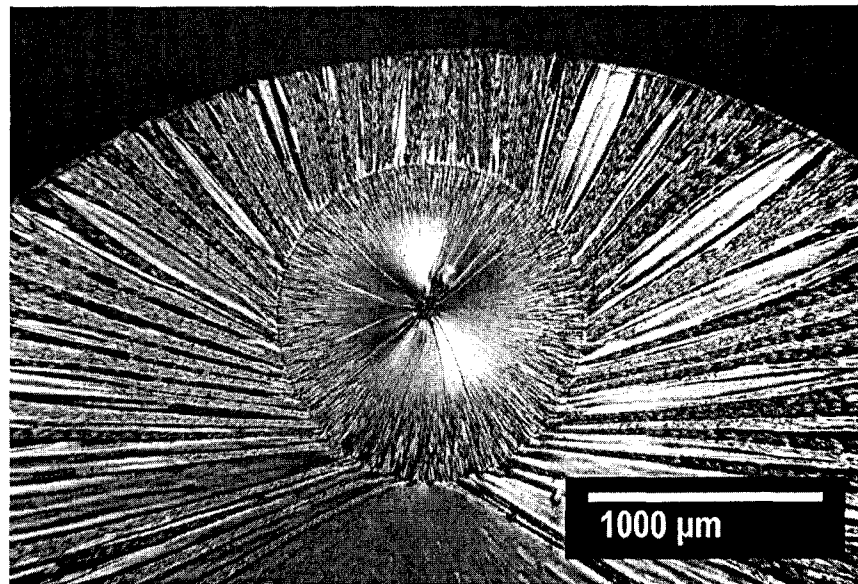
Fracture surface of the fatigue crack initiated from the inside of the specimen.
